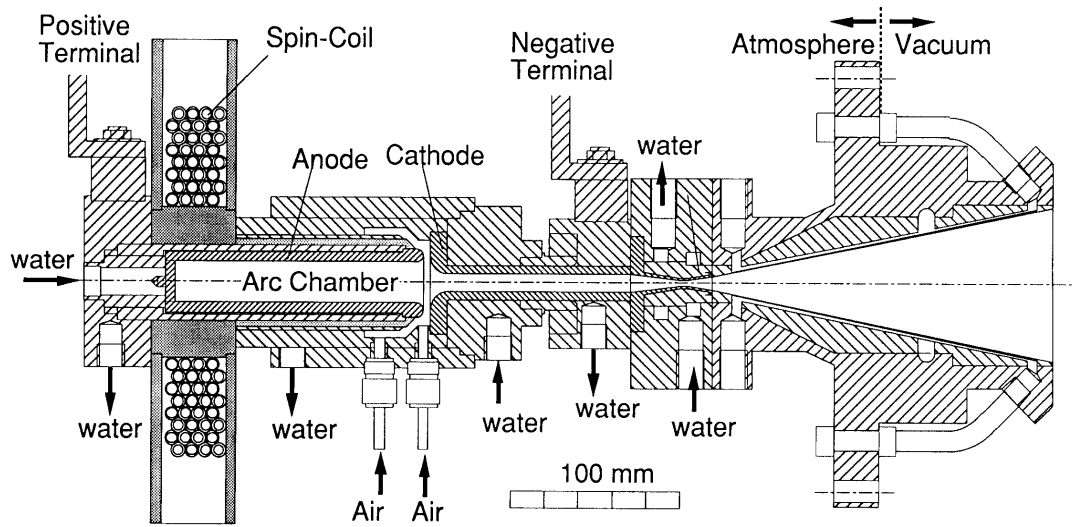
A Cross Sectional View of the Huels-type Arc Heater Assembly
